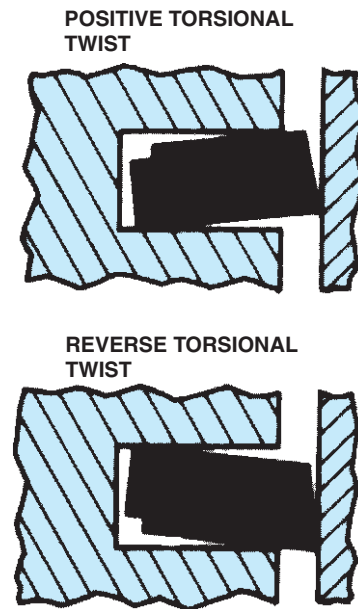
Torsional twist rings provide better compression sealing and oil control than regular taper face rings.
